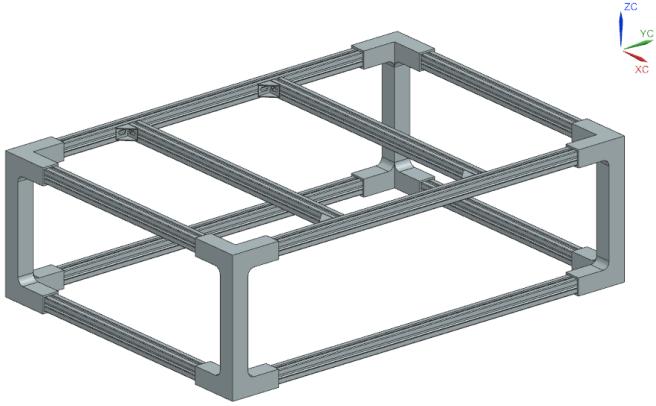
(Isometric View of Chassis Frame CAD)
